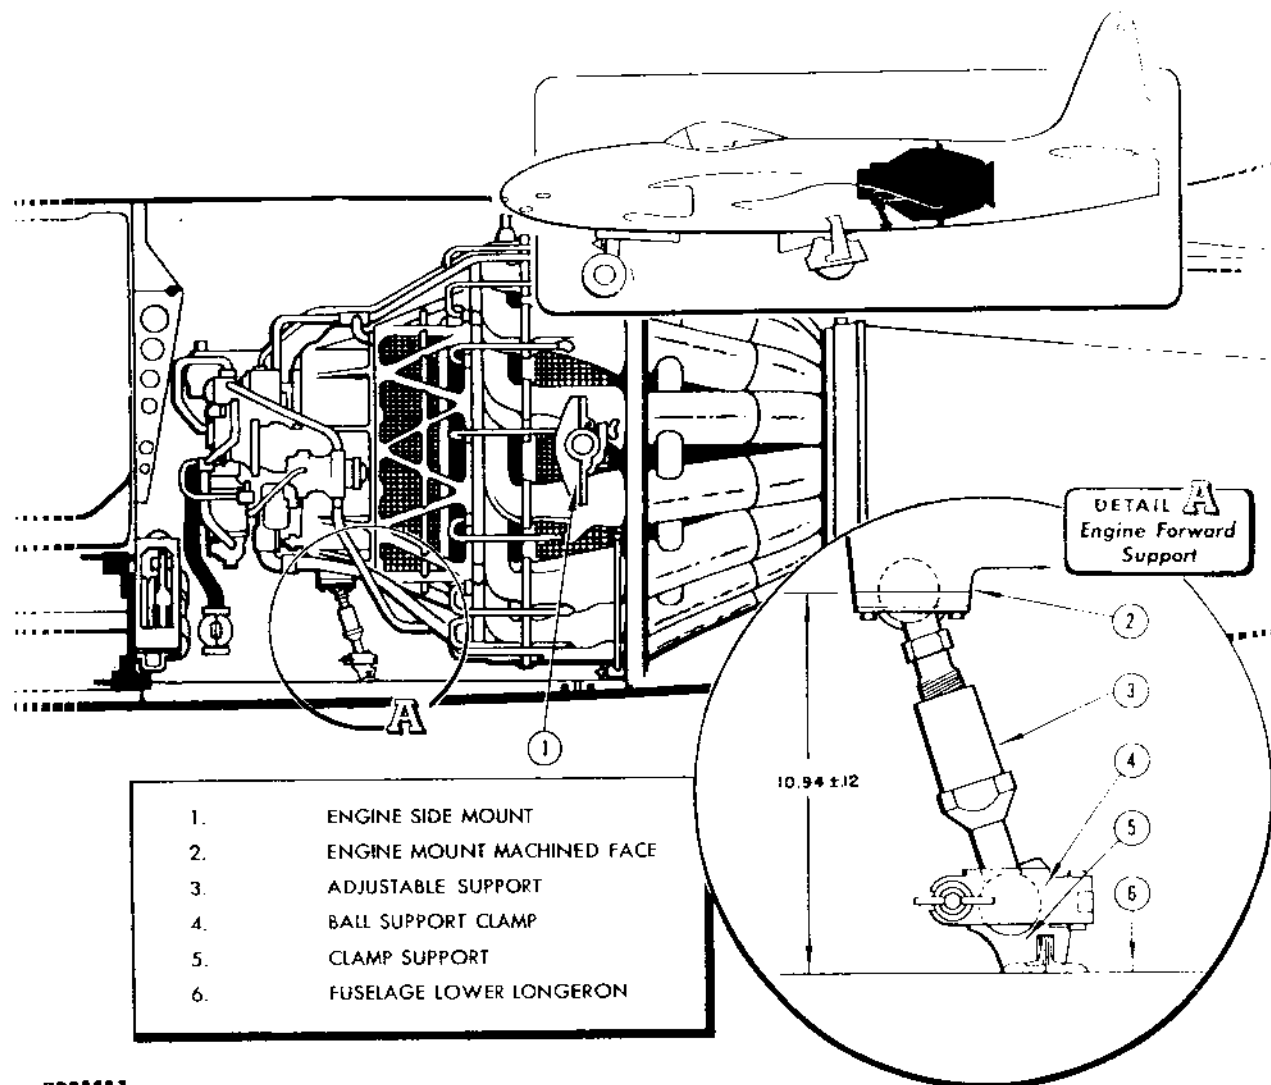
(Sheet 7 of 7 Sheets) — Aft Section and Engine Removal
